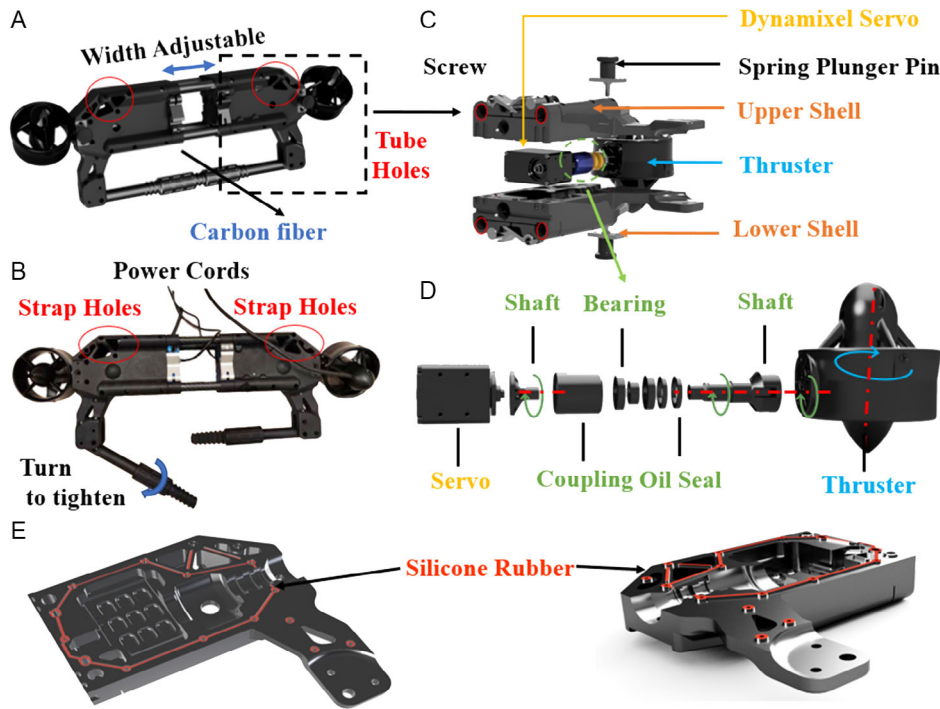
Engineering design of the reconfigurable underwater superlimb module. A) CAD illustration of underwater superlimb with adjustable width with thrust vectoring. B) The strap holes on the engineering prototype for wearing on the BCD. C) The drive unit in an exploded view, including the 3D-printed upper and lower shelters and the thrust vectoring module. D) The thrust vectoring module using a servo (Dynamixel XW540-T140-R) coupled with a thruster (Blue Robotics T200). E) Waterproofing using customized sealant between the upper and lower shelters.
